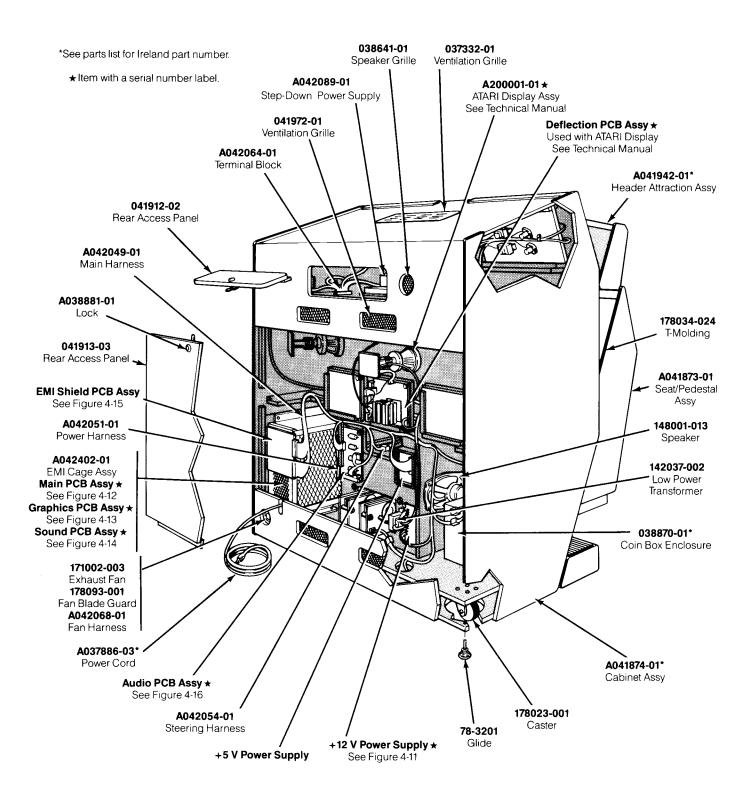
Cabinet-Mounted Assemblies, continued A041945-XX A
